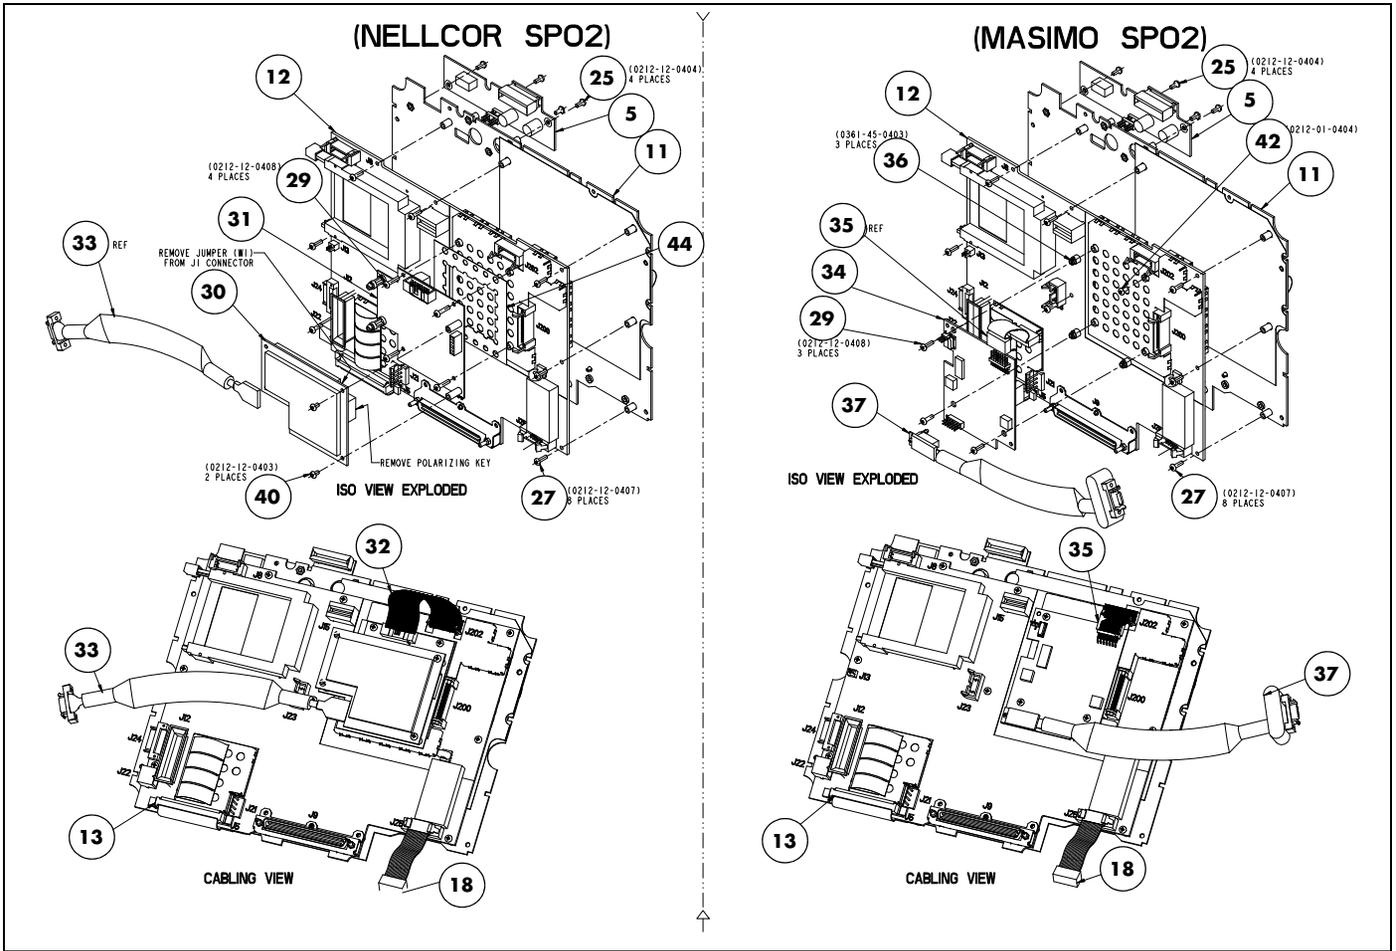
Rear Housing Assembly (For use with Spectrum P/N 0998-00-1000-XXXXX only)
